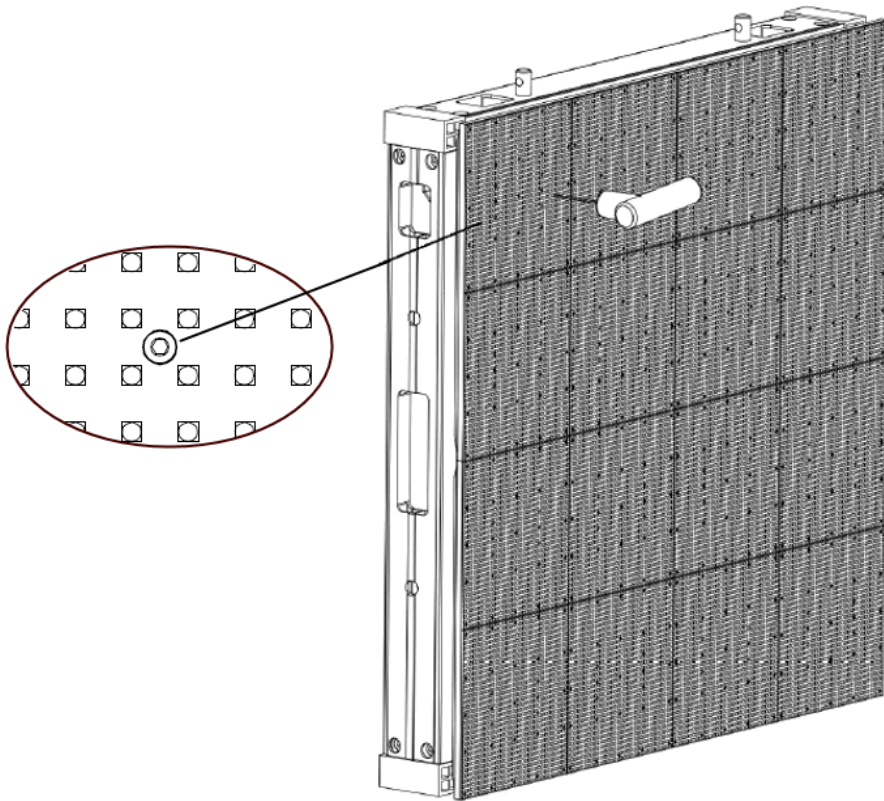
Disassemble Lamp Board with Hex Wrench
